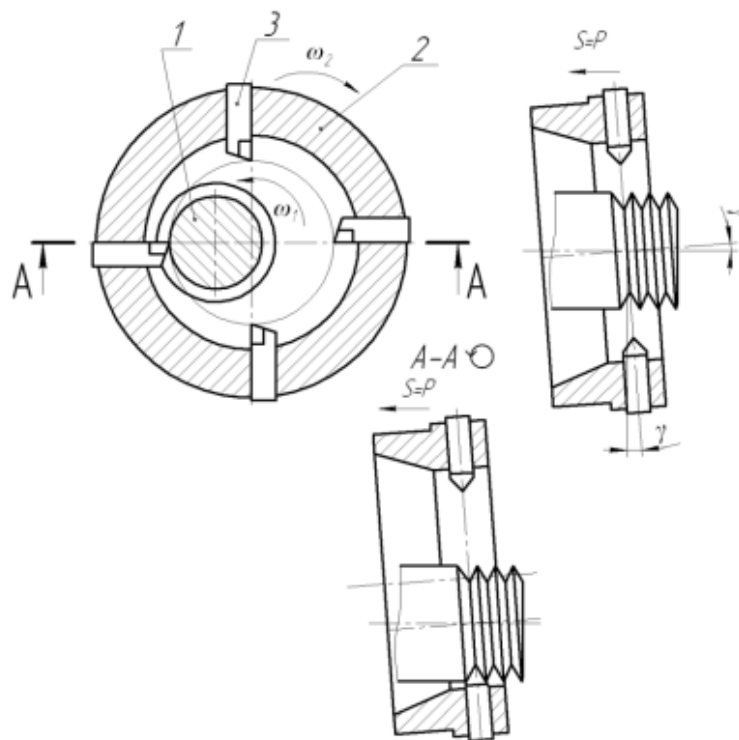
Schema of whirling process: 1-workpiece, 2- whirling head *вихрова головка*, 3-cutting tool.
